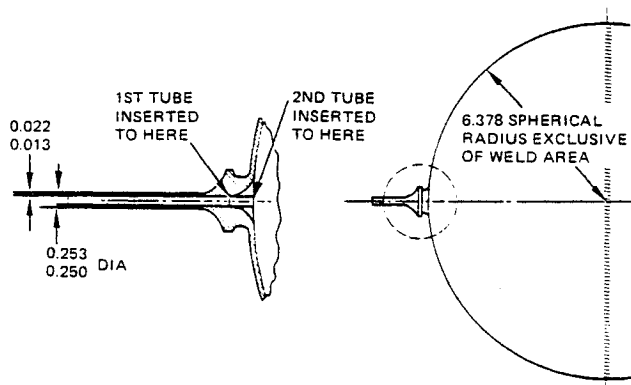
3/16-in.-diam tube locations in tank outlet.
